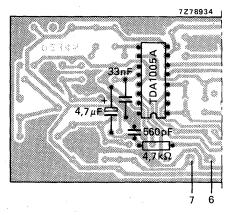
Printed-circuit board component side, showing component layout of Fig. 15.
